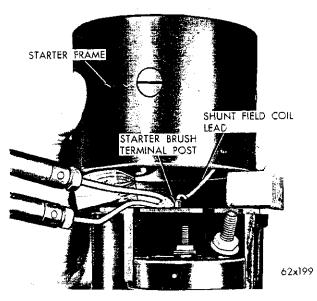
Unsoldering the Shunt Coil Lead Wire
